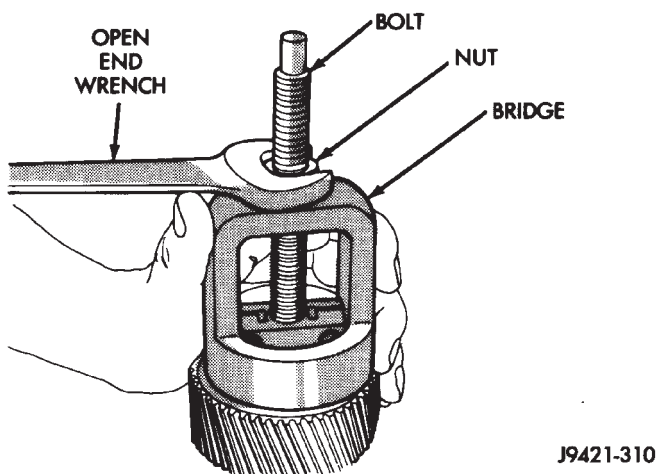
Removing Mainshaft Pilot Bearing From Input Gear
